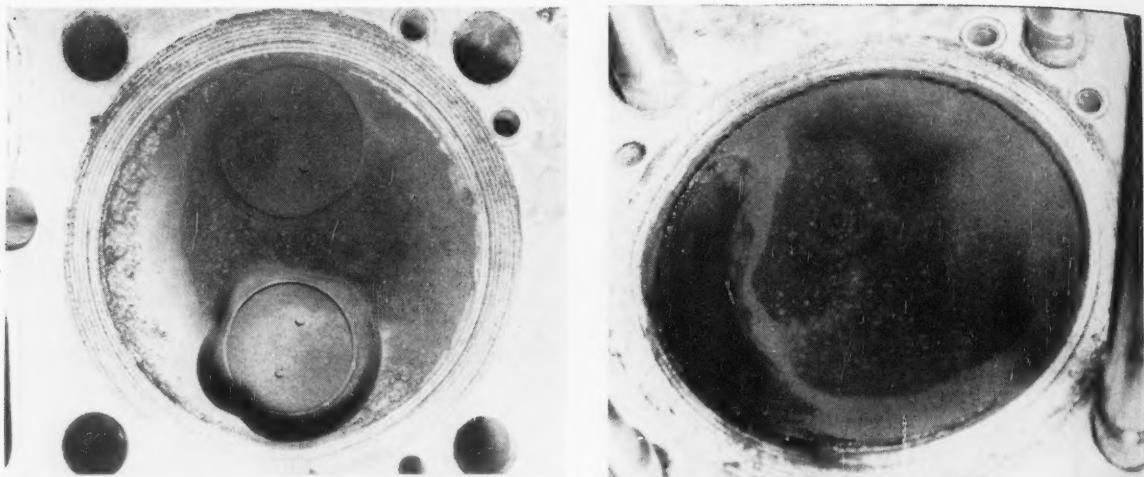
Good condition of valves (left) and piston head (right) after 25-hour test of single cylinder, 4-cycle Diesel engine burning Diesel oil and powdered coal at an oil-to-coal ratio of 1 to 1.
